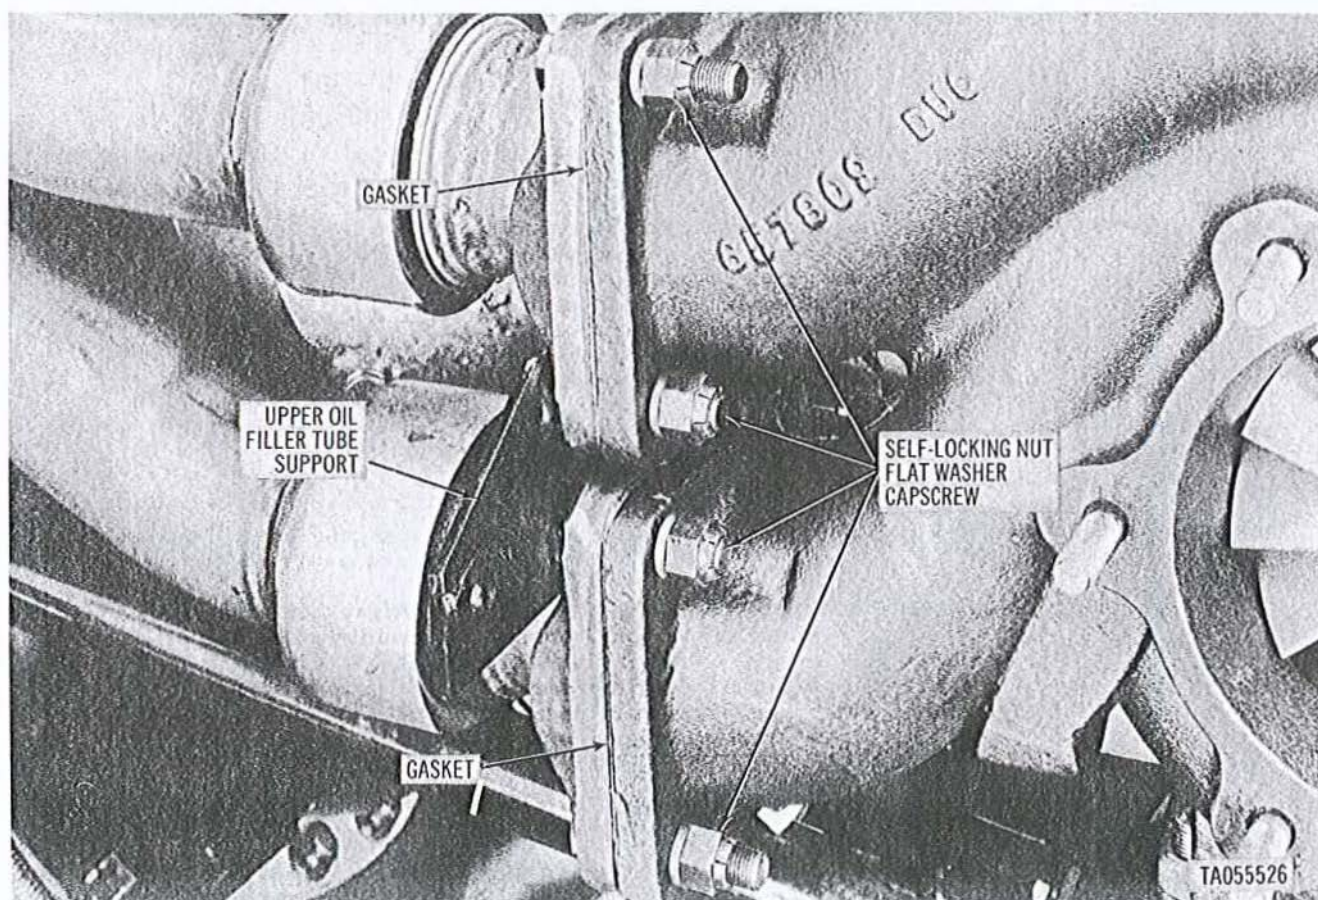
Disconnecting or connecting exhaust pipes at turbine housing, model AVDS-1790-2DR engine.
